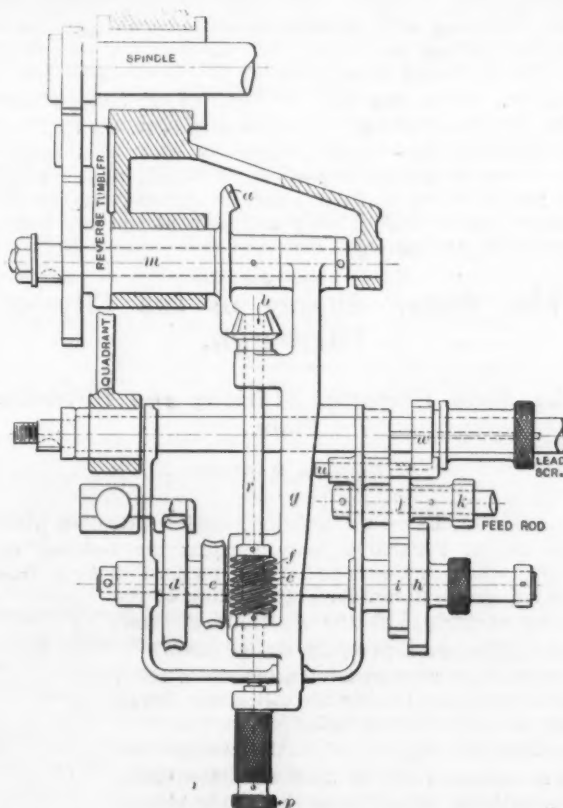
Development of the Gears in the Positive Feed Drive.
